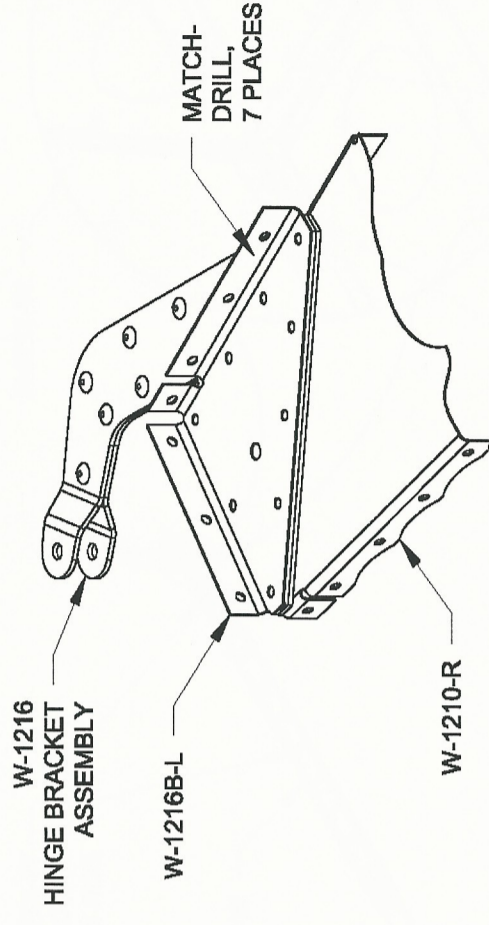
MATCH-DRILLING THE FLAPERON HINGE BRACKETS AND MAIN RIBS
